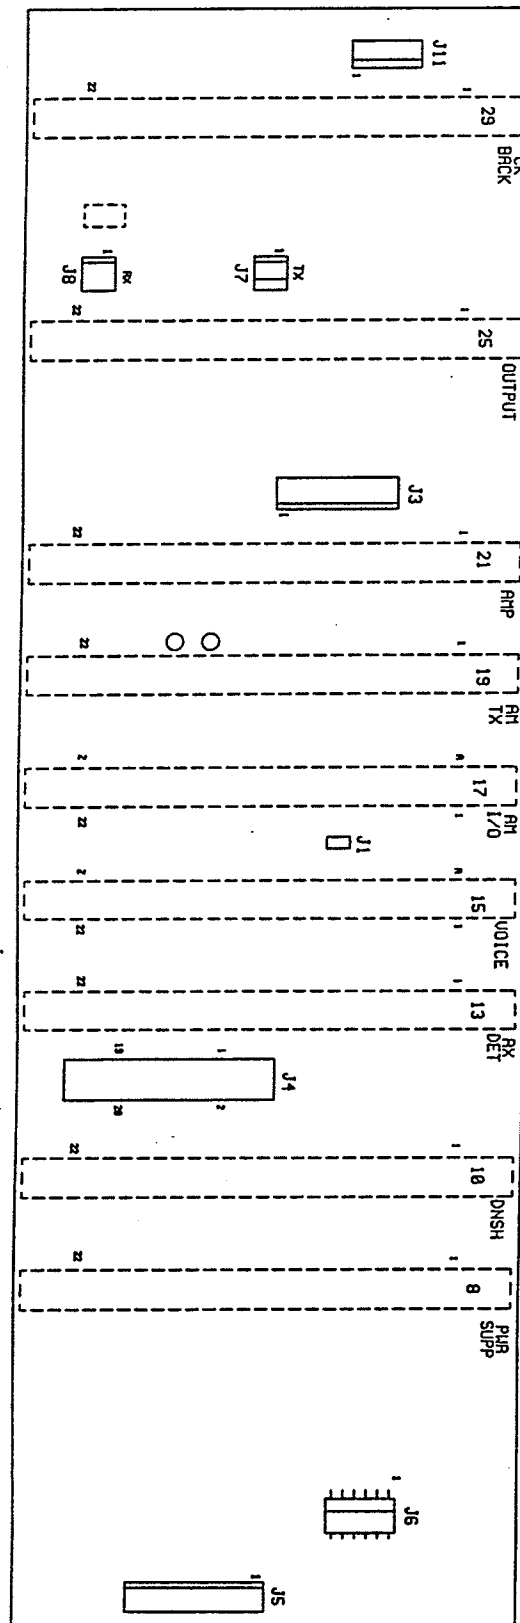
Component locator drawing, RFL 67P INTERCONNECT Chassis Motherboard
